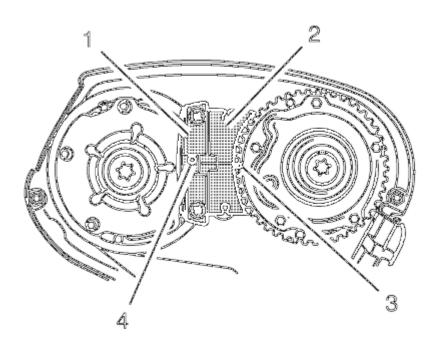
Installing Fixture Plate, Bolt, & Bushing Onto Engine Block Courtesy of GENERAL MOTORS COMPANY
